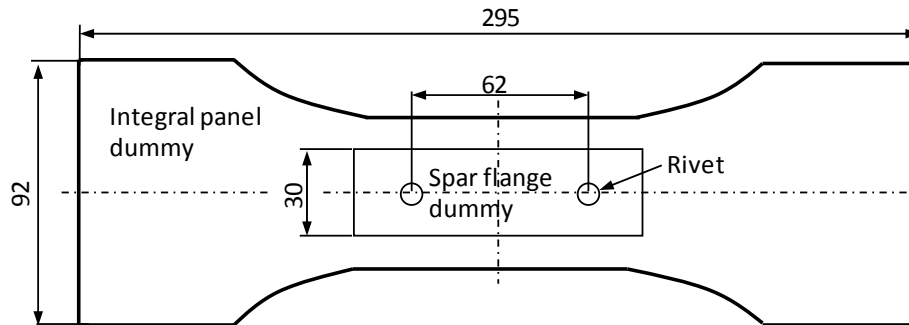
Specimen representing the longitudinal joint of integral wing panel and the spar flange; dimensions in mm
